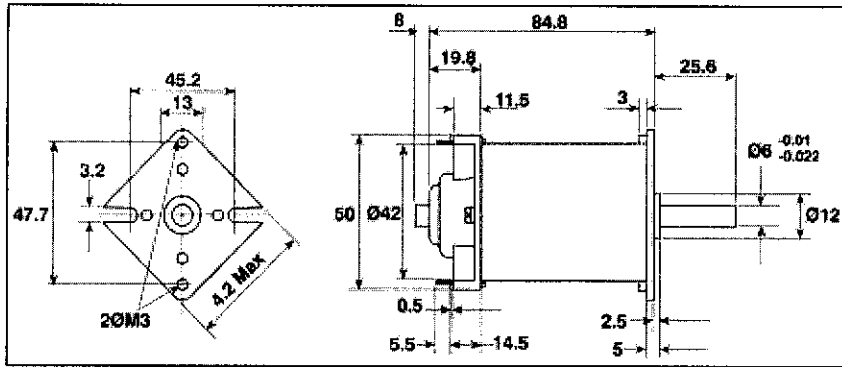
Detail Drawing of 12V 2000 rpm RS DC Motor
